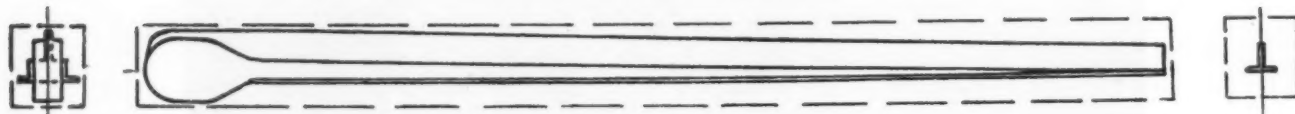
STRAIGHT BLANK FOR SPAR CAP
